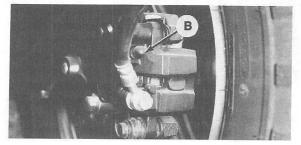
Front caliper bleed screw (B) is accessible after removing dust cap.
